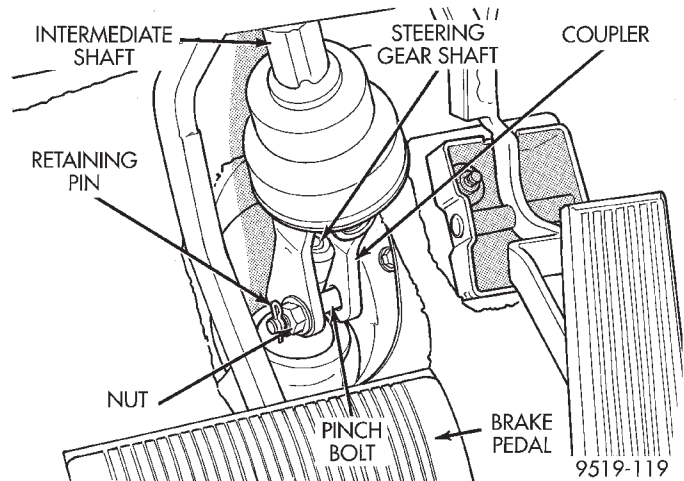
Intermediate Shaft Coupler Attachment To Steering Gear
